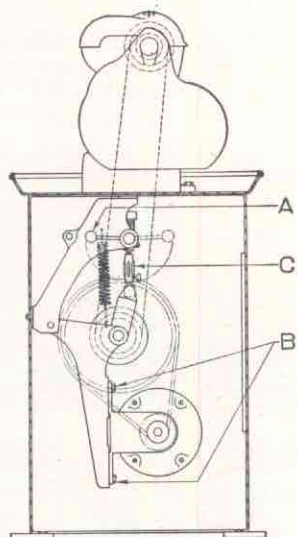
Underneath Motor Drive Arrangement for 9" and Light Ten South Bend Lathes
